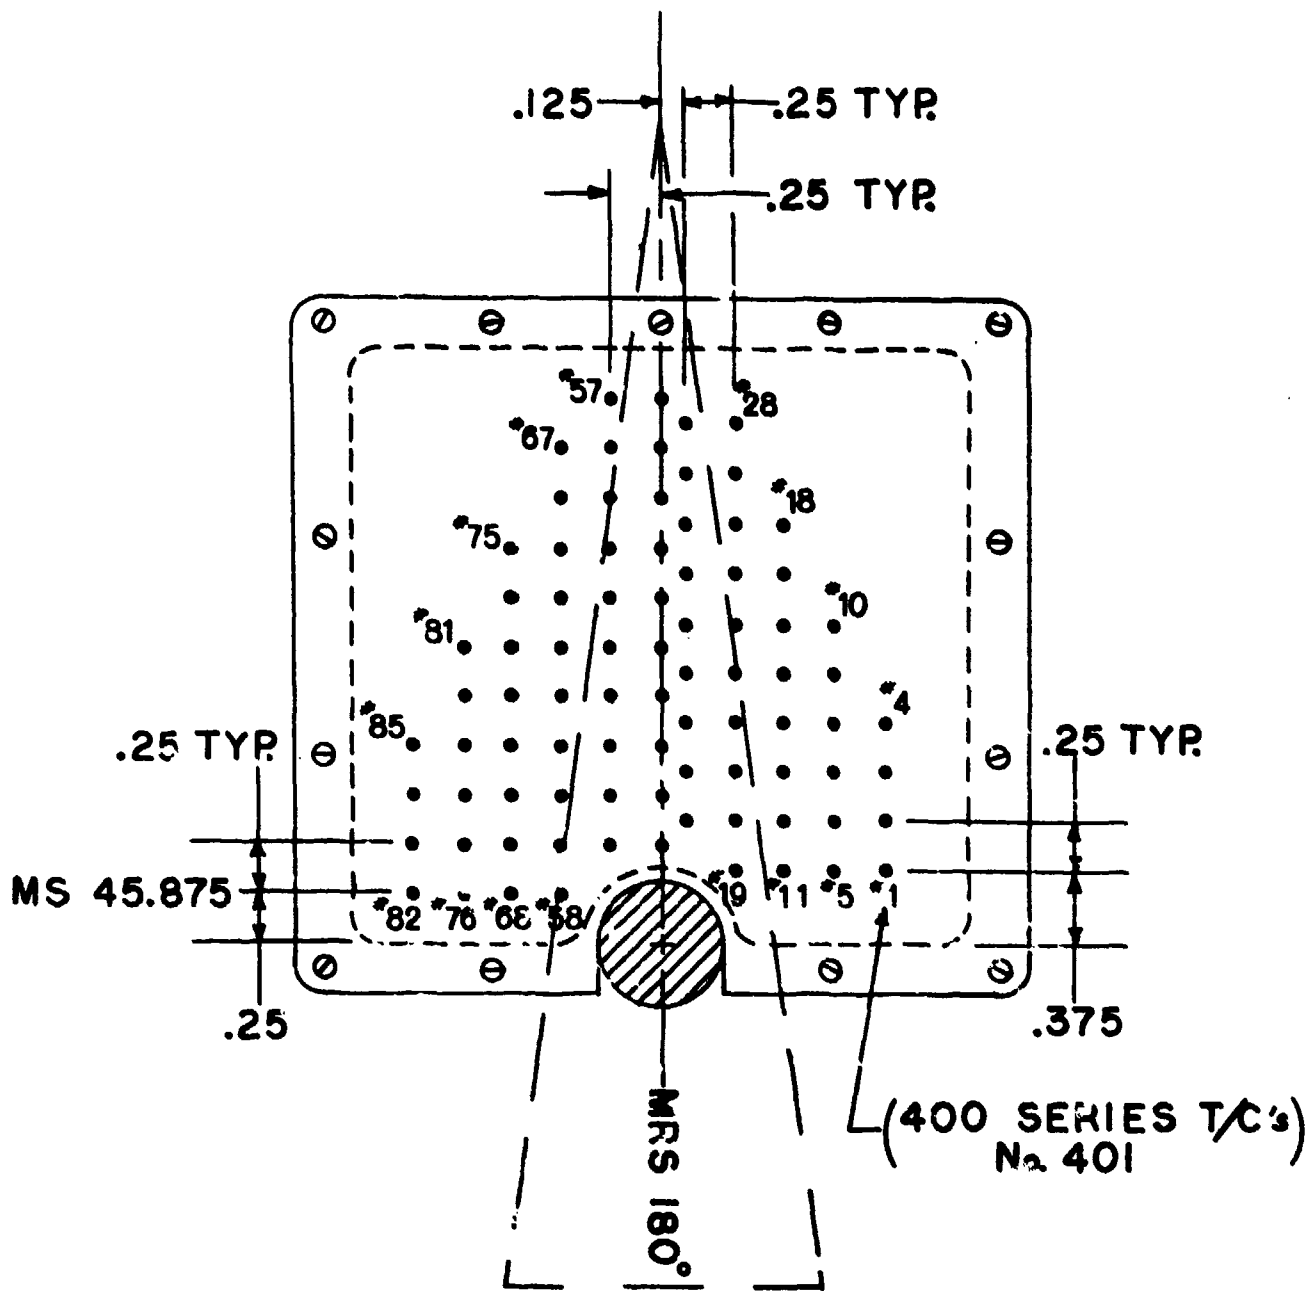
THERMOCOUPLE LOCATIONS FOR TORQUE TUBE FIN INSERT
